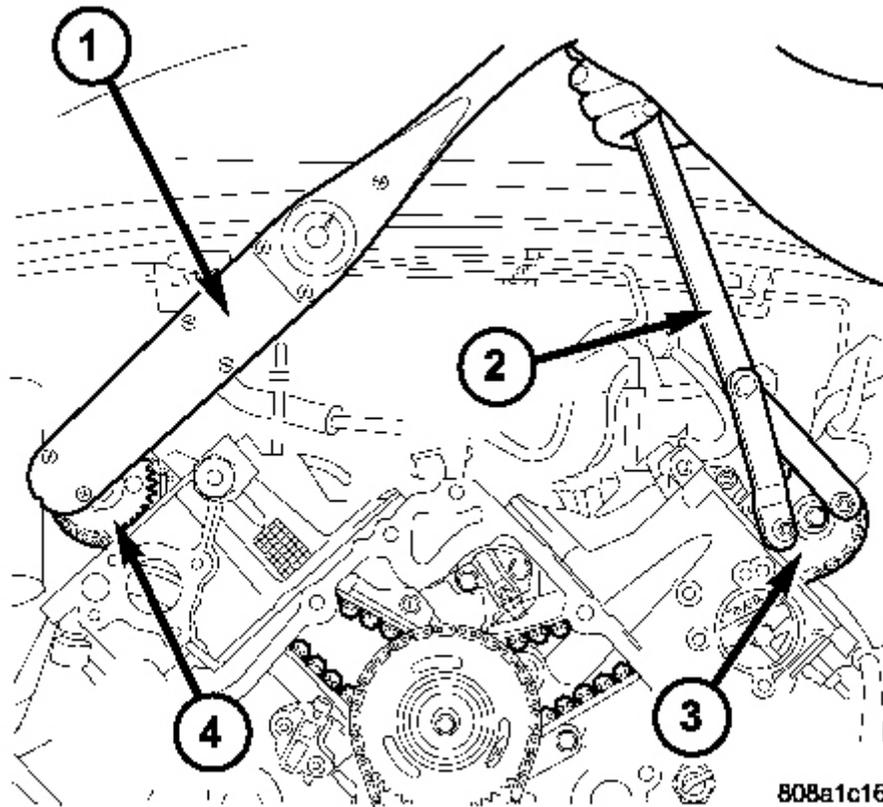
Tightening Right Side Camshaft Sprocket Bolt
